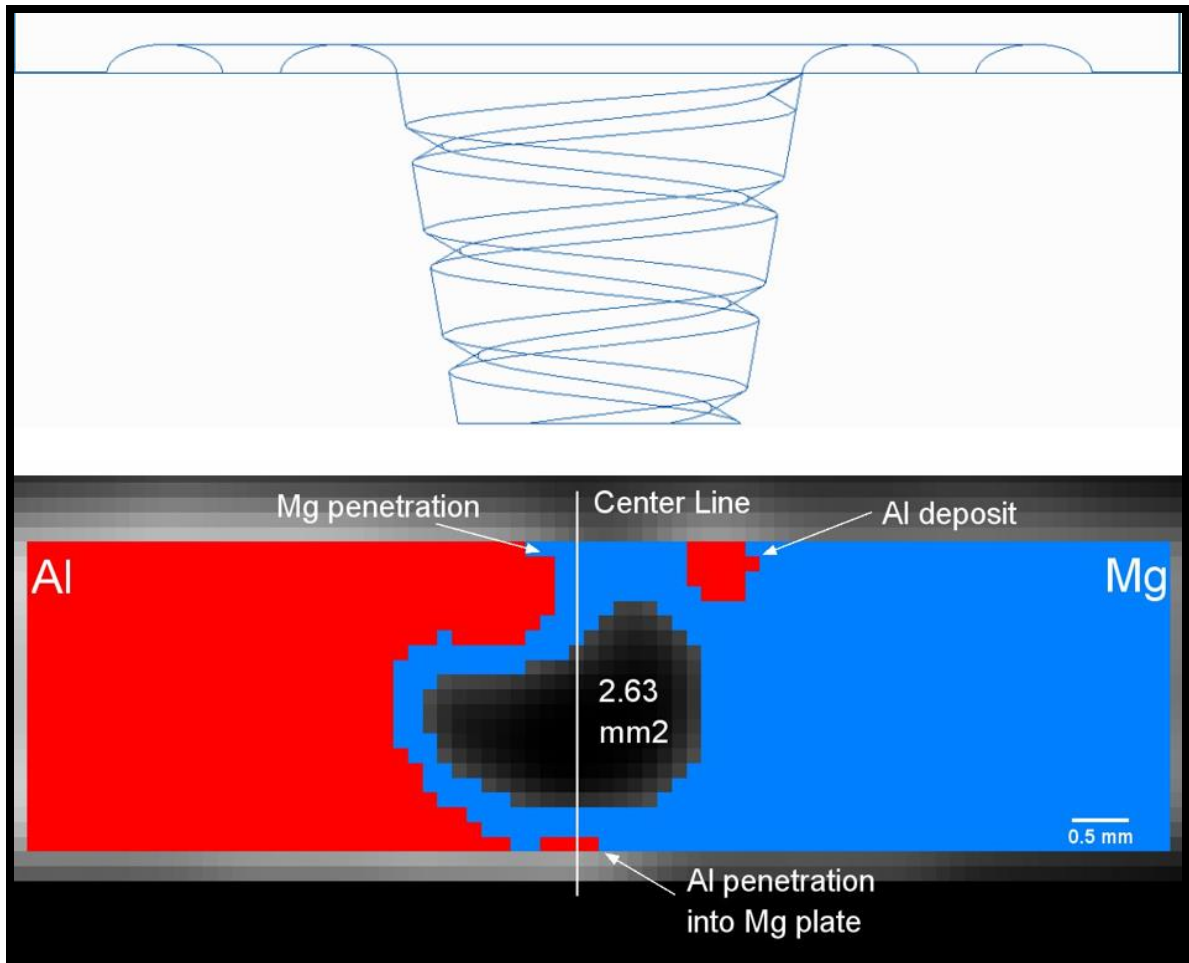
Zoomed-in view of cross-section A-A (bottom), the centerline of the weld is marked with a vertical white line. The material mixing is indicated with arrows; the defect area is shown, (top) outline of the tool used for sample (e) shown at the same scale.
